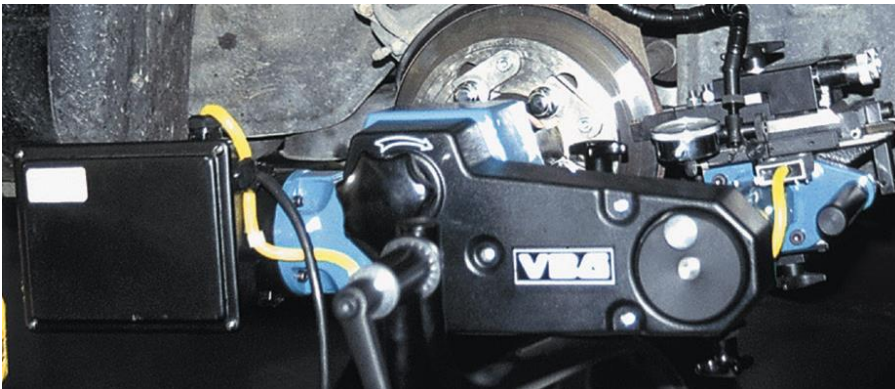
An on-car lathe uses an electric motor to rotate the hub while machining the rotor.
